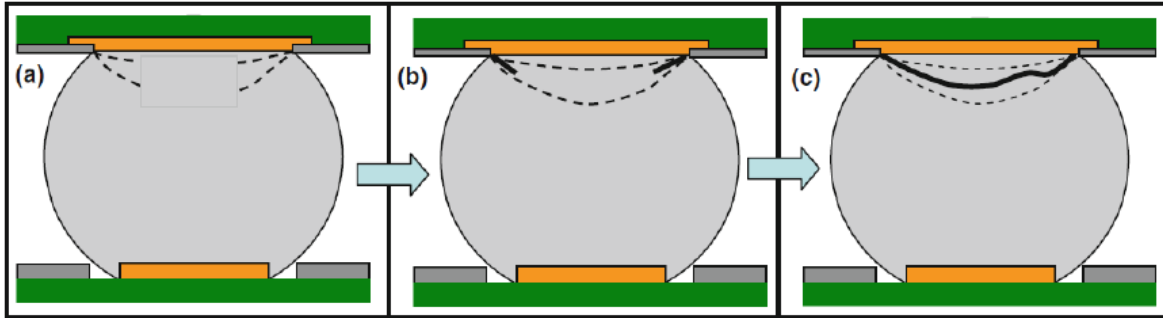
Formation of cracks in BGA solder joints during thermomechanical fatigue [52]
